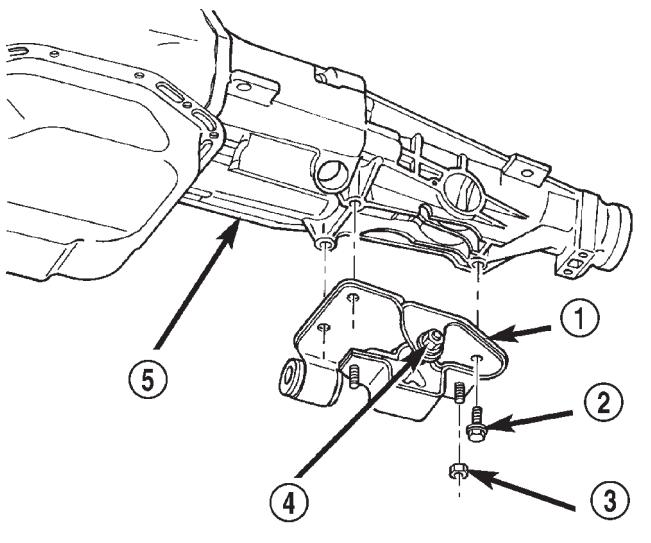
Engine Rear Mount—4X2 Automatic Transmission
